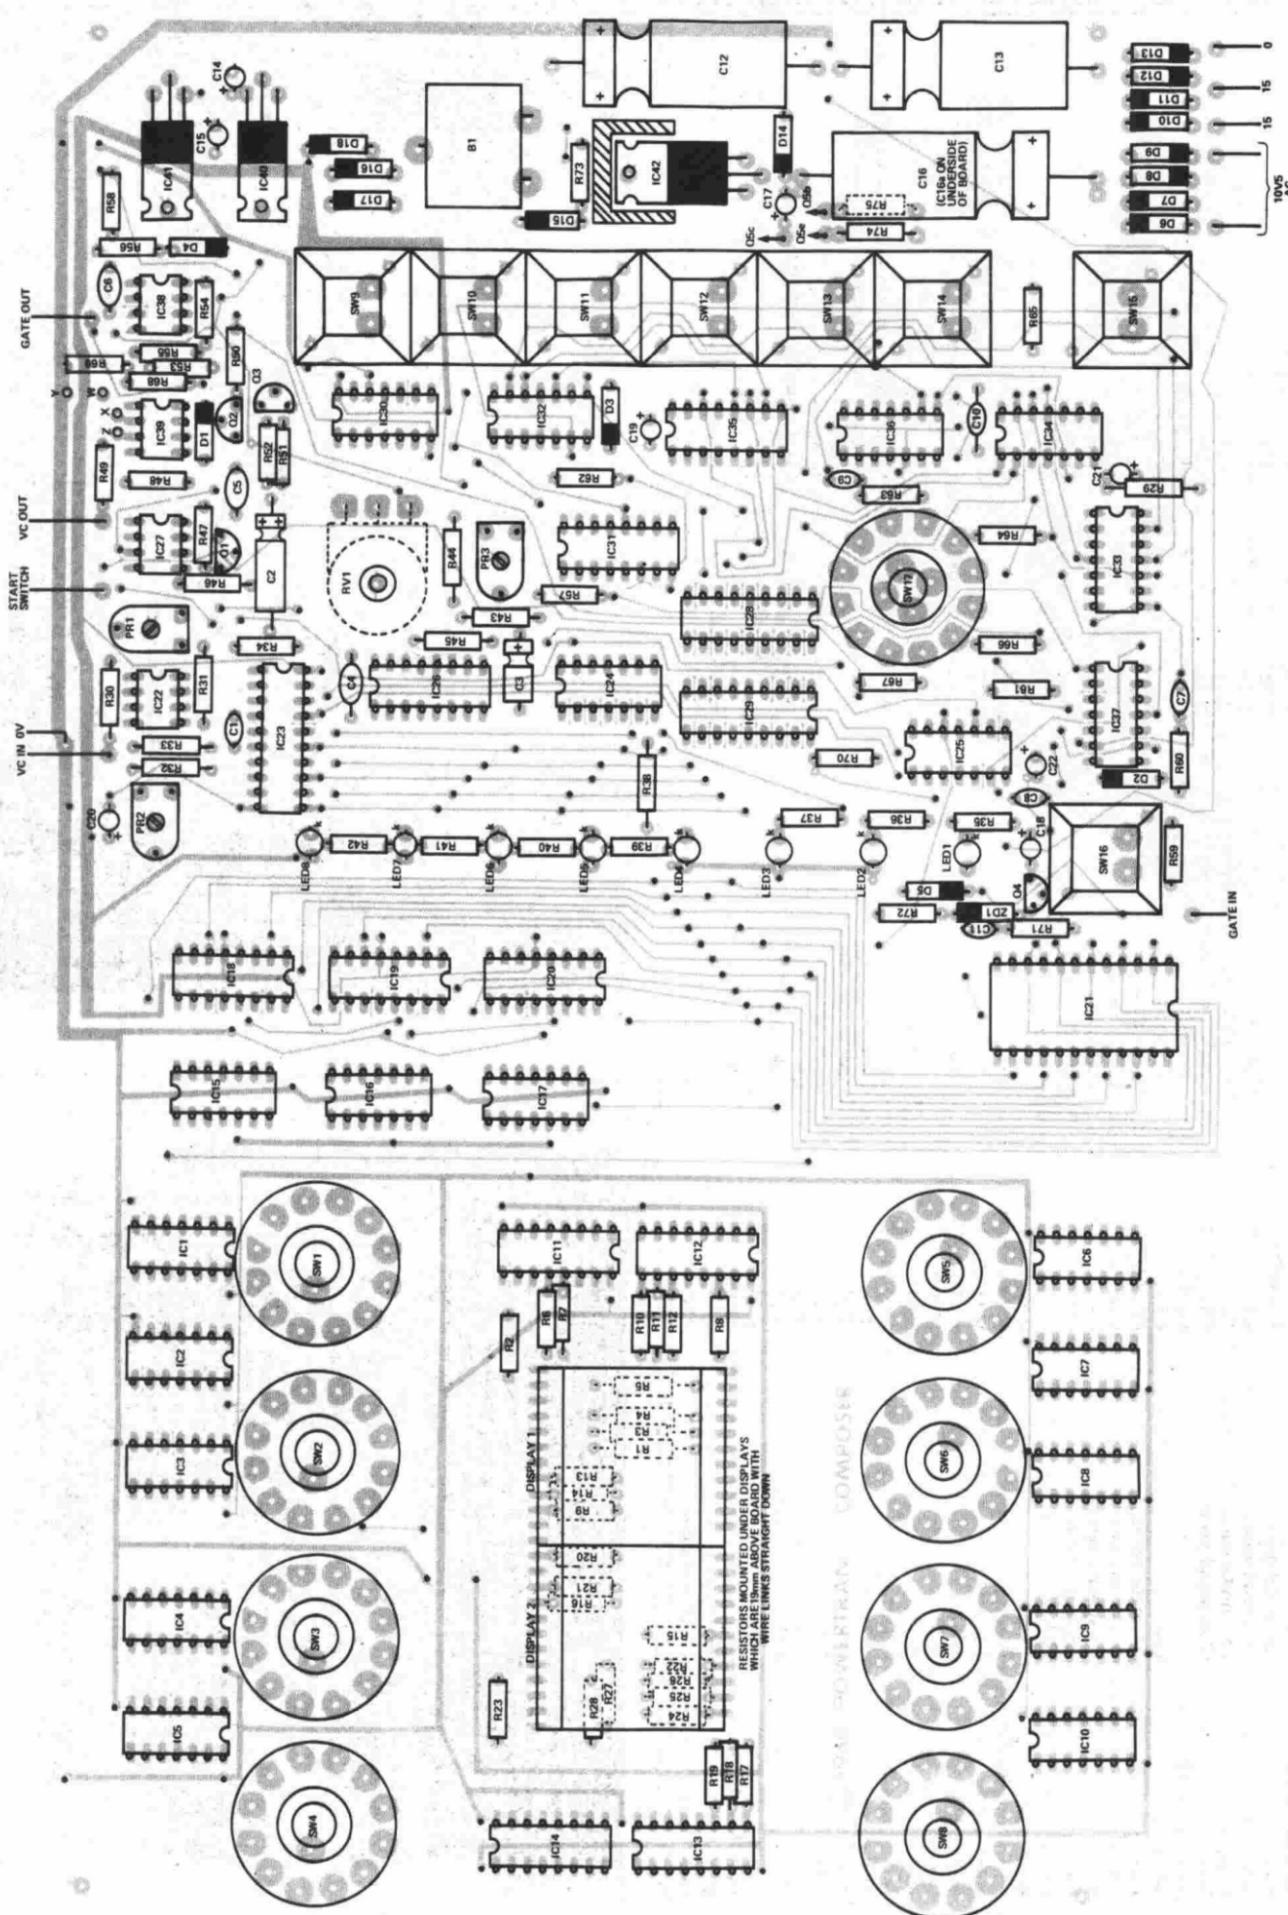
Overlay for the composer. The PCB is double-sided; note that this view is of the component side of the board and shows the copper tracks for that side. C16a is soldered underneath the board using the spare pads adjacent to C16.
